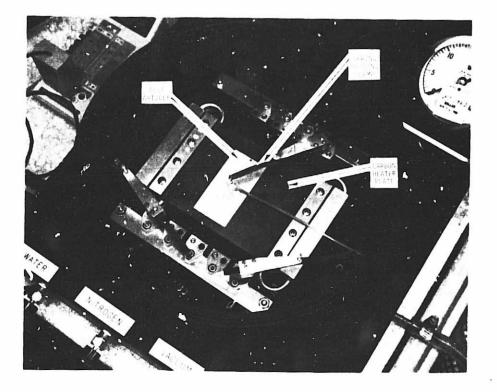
Diode/Heat Sink Unit Mounted on Heater Plate of Inert Atmosphere Soldering Unit
